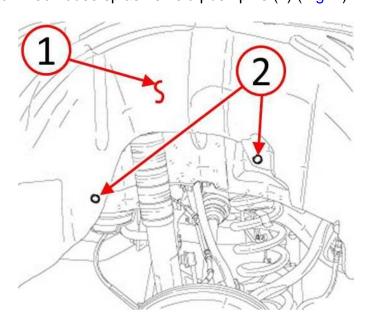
Wheelhouse Splash Shield - Remove Push Pins
